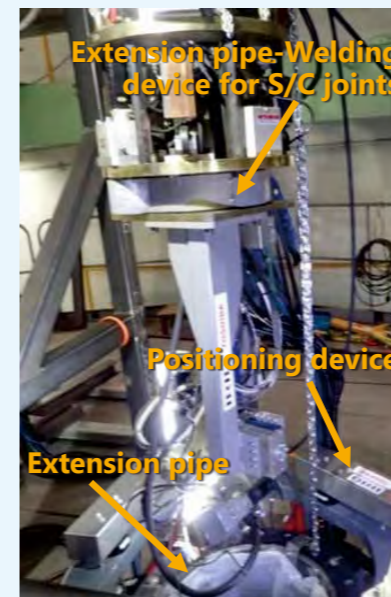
Injection into extension pipe-welding device for S/C joints
